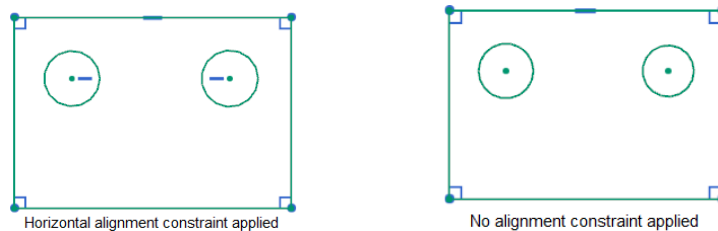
Sketch after selecting the Create Alignment Constraints check box
